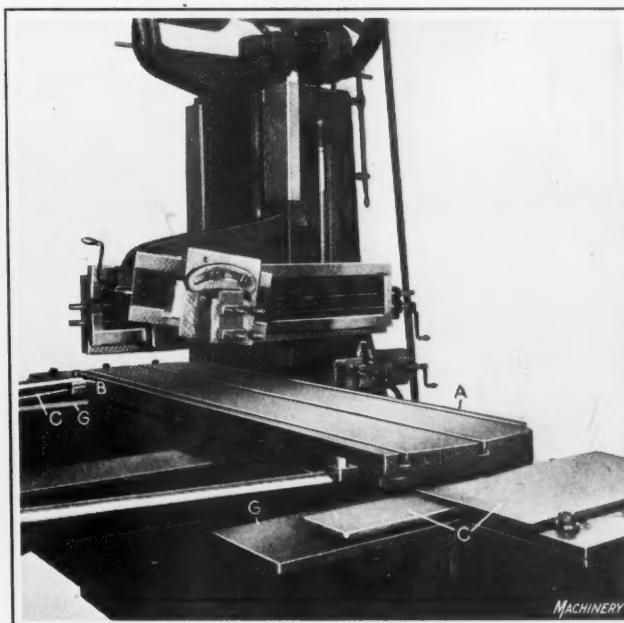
Close-up View of Radius Planing Attachment for Use on an Open-side Planer. Adjustment is furnished for Different Radii
